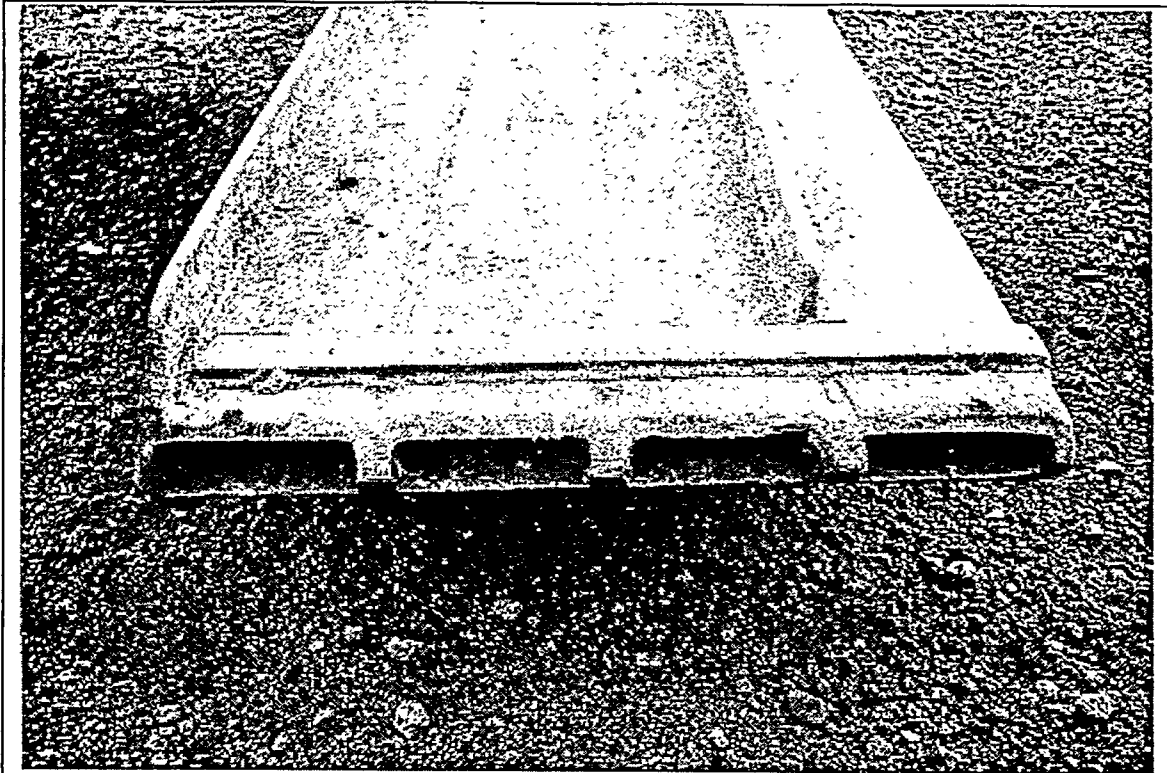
Rectangular Tubes Welded Together and the Stiffening Plates
